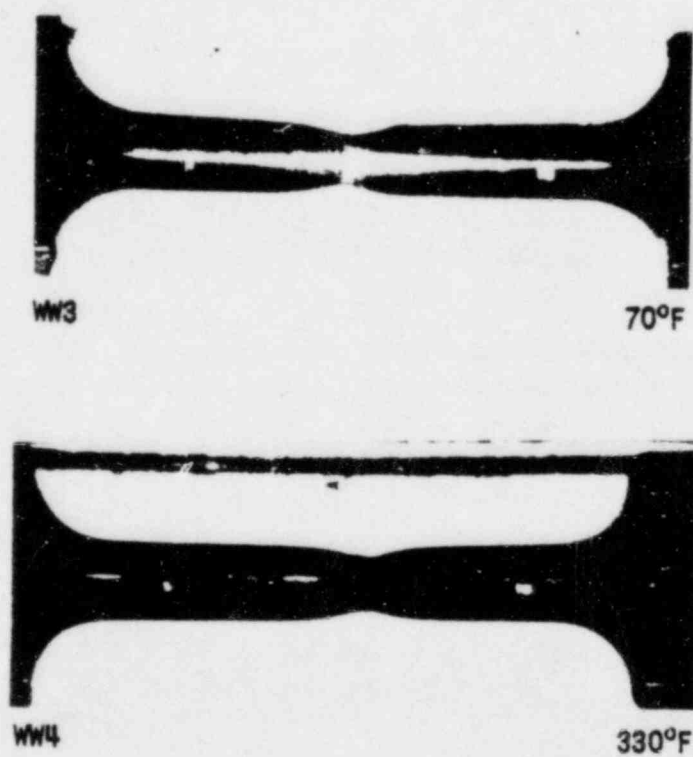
Fractured Tensile Specimens From Point Beach Unit No. 1 Weld Metal
